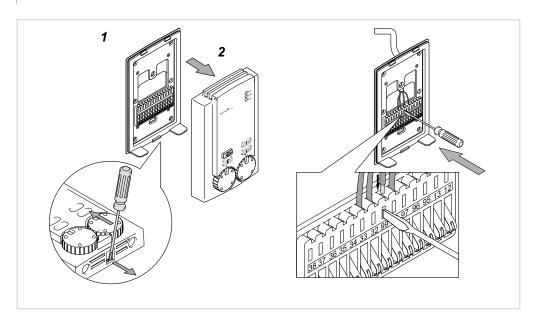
Opening the controller Pos. 1: Mounting plate Pos. 2: Top section
